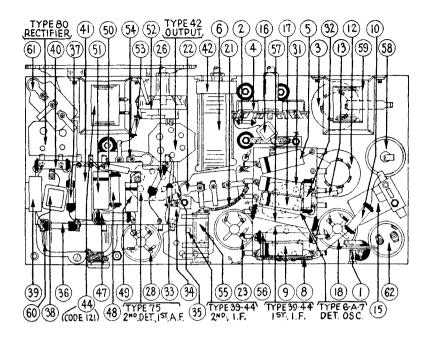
Bottom View of Chassis, Showing Parts, and Position of Compensating Condensers Located,—and Reached,—from Below Chassis
